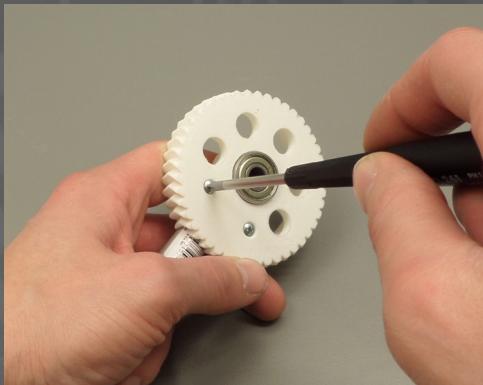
After sliding the tube into the main gear the bracket is mounted, ensuring that the tube stays in place.
